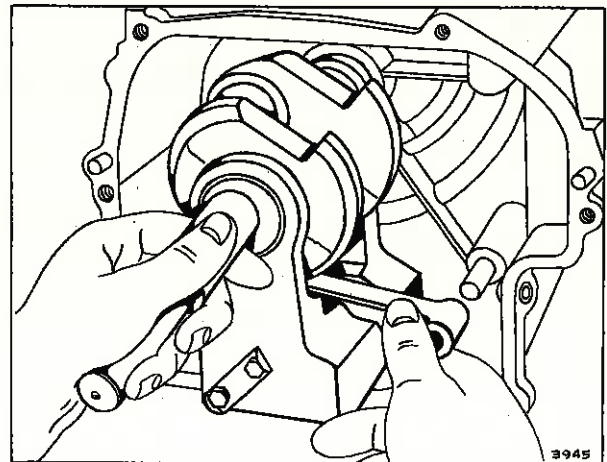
Installing Crankshaft and Counterweight Assembly
